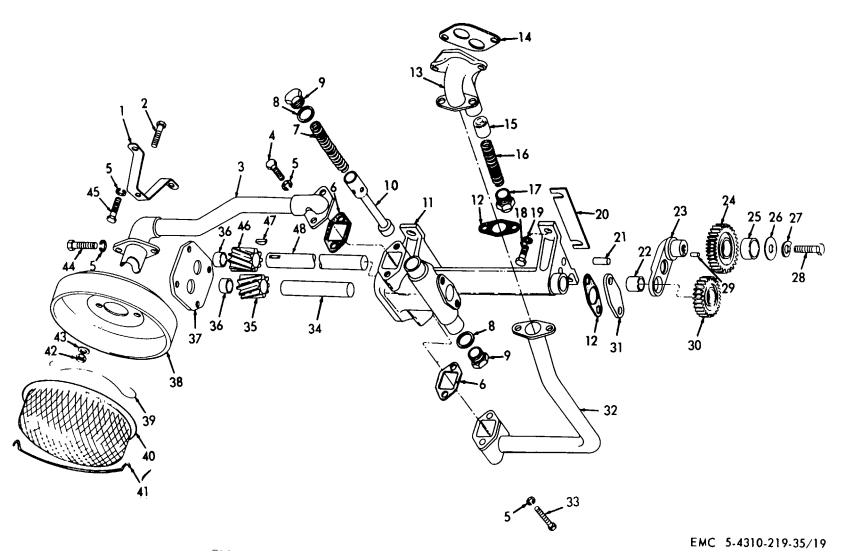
Engine oil pump and oil pressure regulator, disassembly and reassembly.
